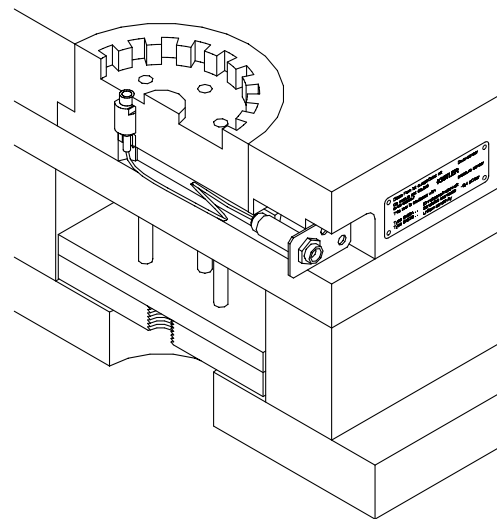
Sensor, cable, connector, mounting plate (Art. No. 65005208) and identification label
